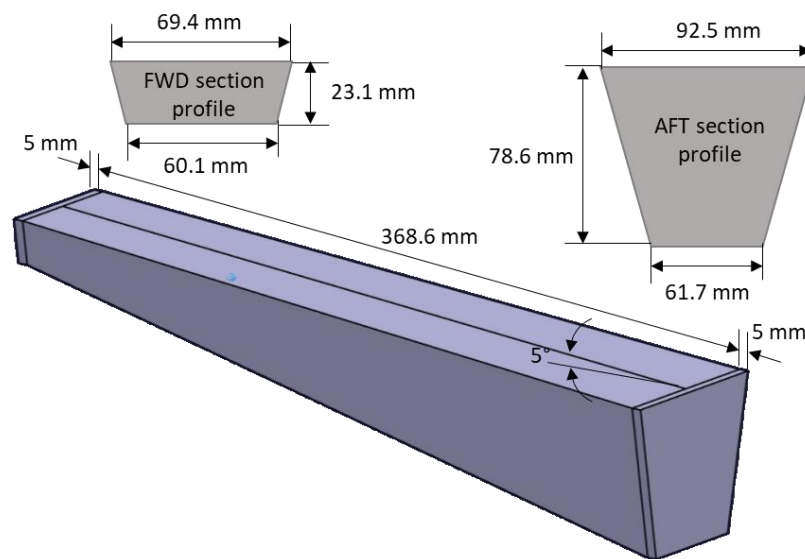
Design space dimensions for experimental manufacturing specimens.
